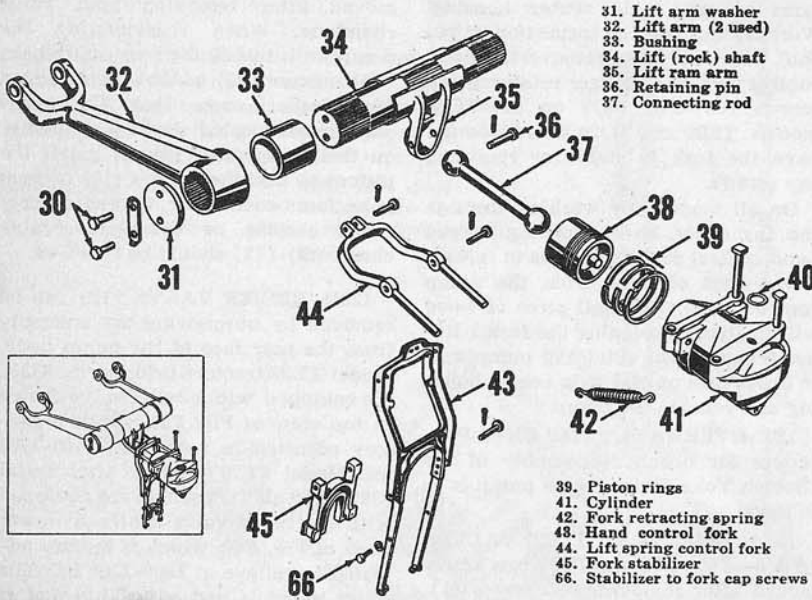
Hydraulic lift shaft and related parts. TO30 tractors use "O" ring seals (40) between the cylinder and lift cover, whereas the TE20 and TO20 use a paper gasket at this point.
